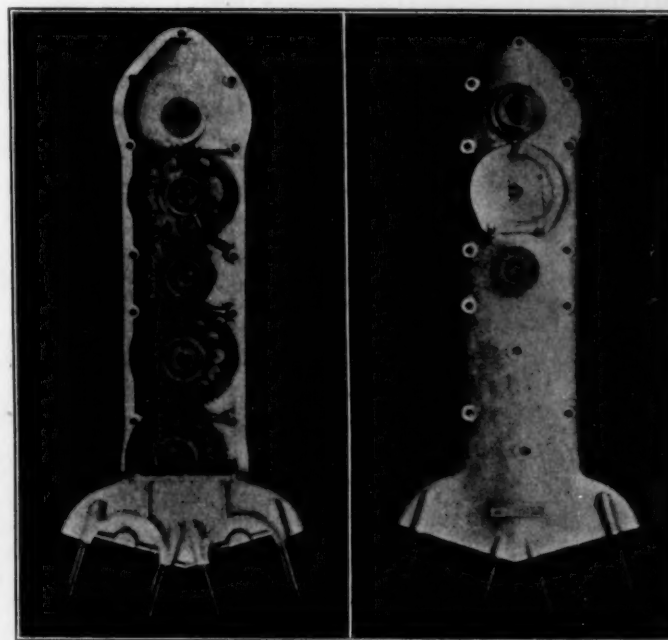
TWO VIEWS OF THE TIMING-GEAR HOUSING
